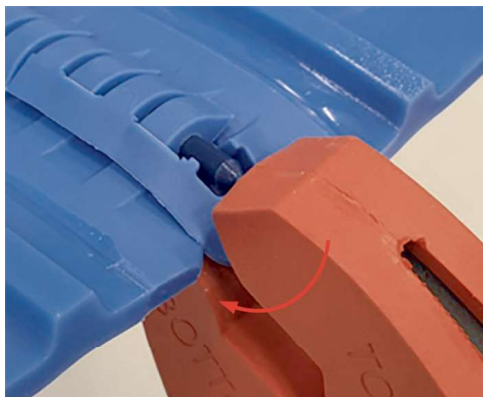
Rod can also be removed with the bottom side of the ThermoLace facing up
